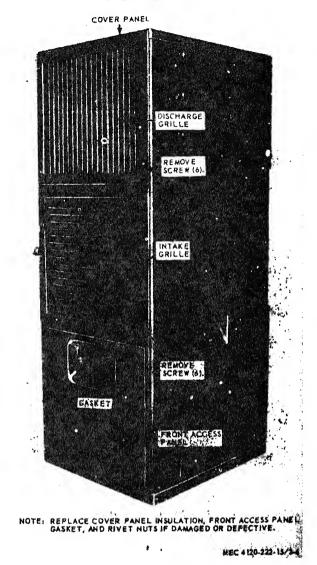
Cover panel, discharge grille, intake grille, and front access panel, removal and installation.
